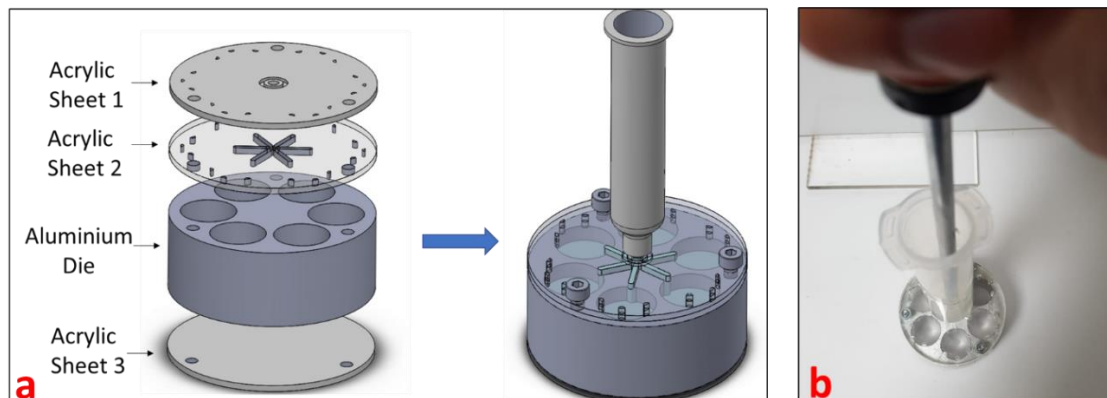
Mould assembly and fabrication process of compression specimens.
